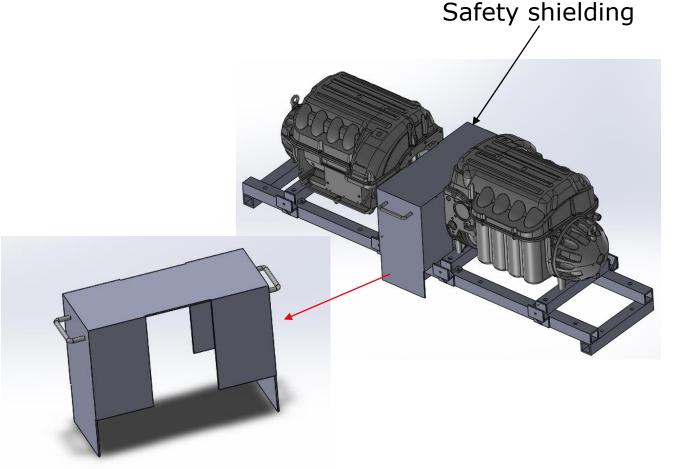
Safety shielding. Figure 35. Assembly with safety shielding.
